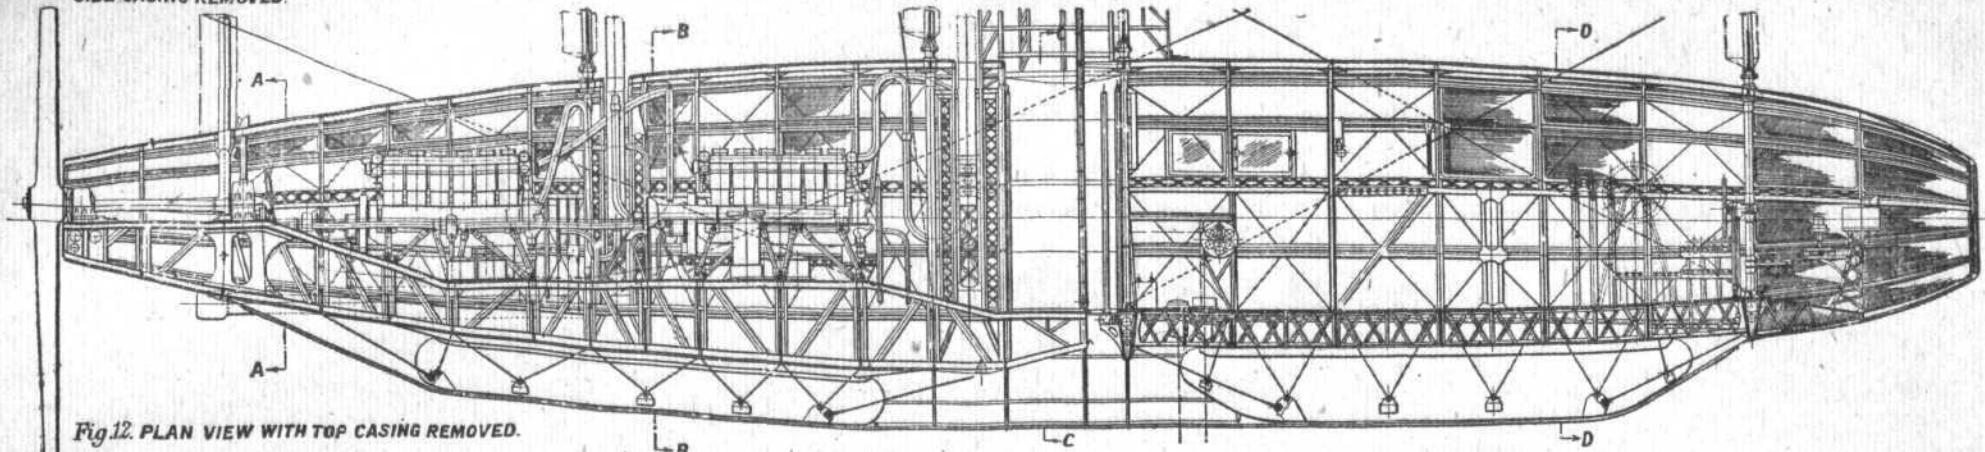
PLAN VIEW WITH TOP CASING REMOVED.
